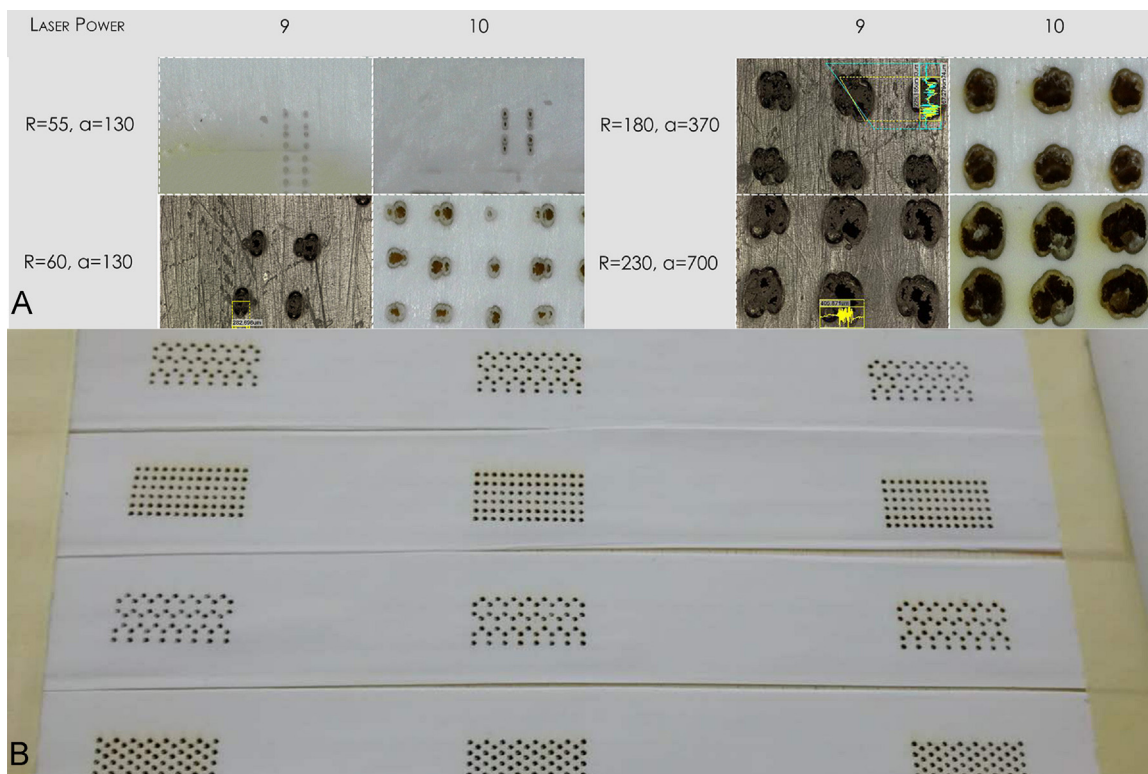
A) Microscope images of Laser cutting trial sessions. R represents the radius of the holes, $2w$ represents the spacing between two holes B) The molds fixed on the wood plate made by laser cutting.
